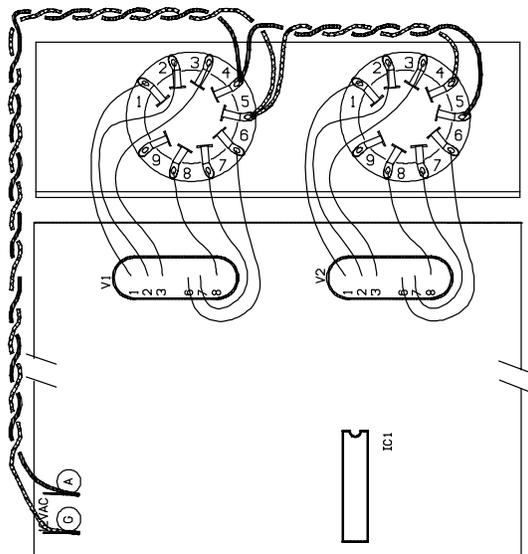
The wires that carry power to the tube filaments are twisted together to reduce magnetic fields. The insulated sleeving used on the other wires is not shown here.
